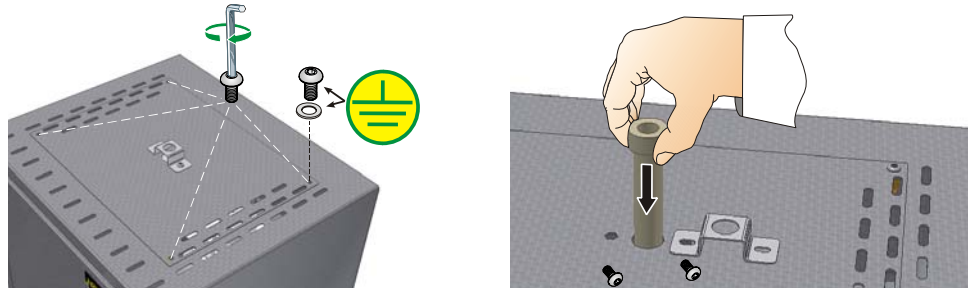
Fix the lid back in place using the screws that you previously unscrewed. Make sure that you place a tooth lock washer between the screw and the lid. This position is marked by a ground sticker on the housing/lid. Loosen the protective metal sheet of the exhaust air tube from the lid. Carefully slide the exhaust air tube into the intended opening. The top of the exhaust air tube must sit on the lid.
